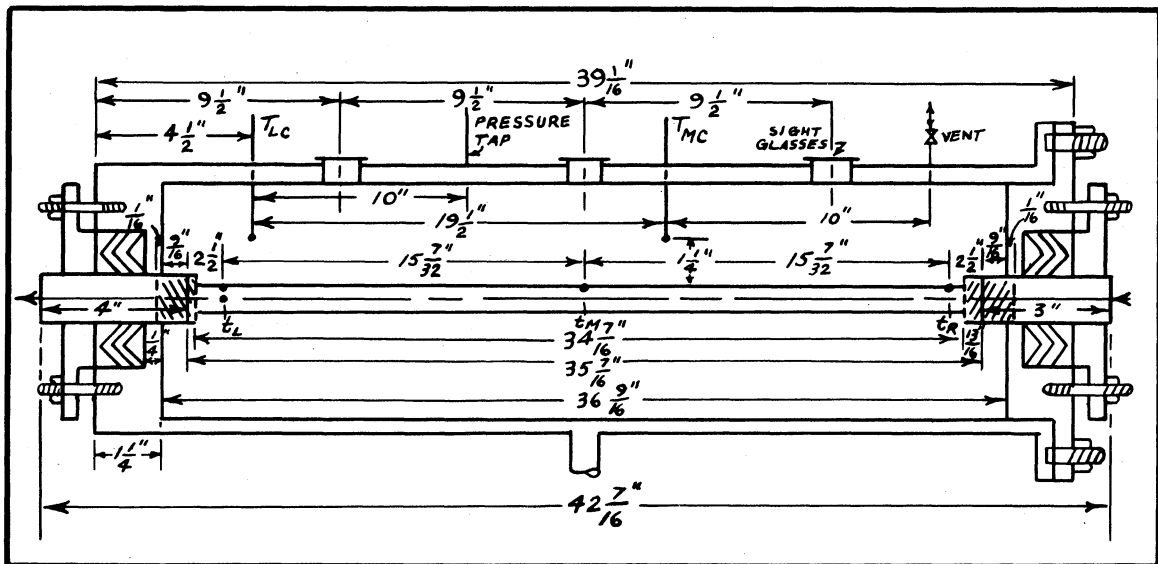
DETAILS OF CONDENSER SHELL AND TUBE
